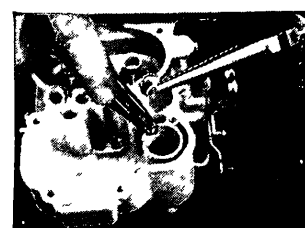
Remove pump strainer, pump check ball, retainer ring and check ball
